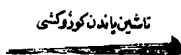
The *tashin*, a toothed scraper, for finely grooving surfaces to be glued.
